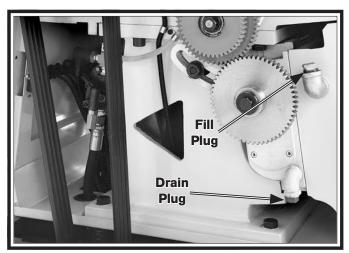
Locations of the quick-change gearbox fill and drain plugs.
